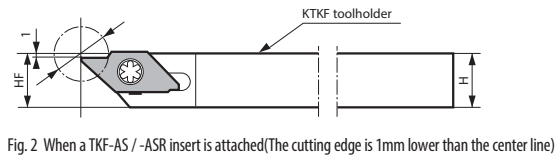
When a TKF-AS / -ASR insert is attached (The cutting edge is 1mm lower than the center line)
